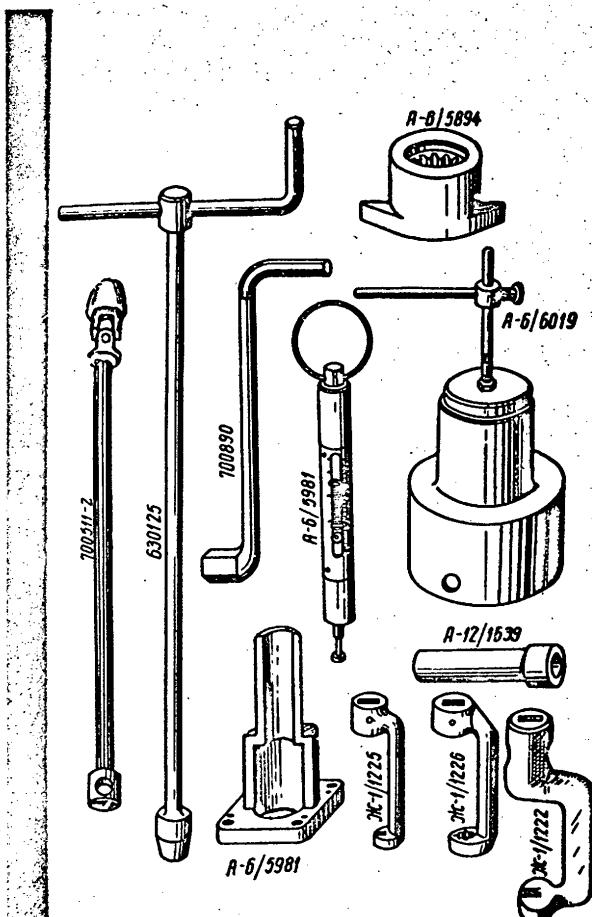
TOOLS AND APPLIANCES FOR ASSEMBLY OF CRANKCASE NOSE-PIECE AND ENGAGEMENT CLUTCH
